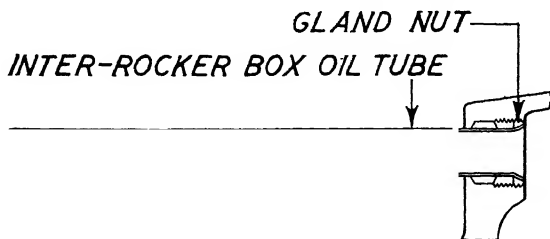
SECTION THROUGH INTER-ROCKER BOX TUBE FOR CYLINDERS, 3, 4, 5 AND 6
